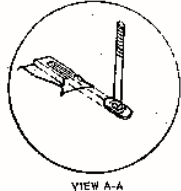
Reworked Washer and Tie-Down Bolt Assembly
